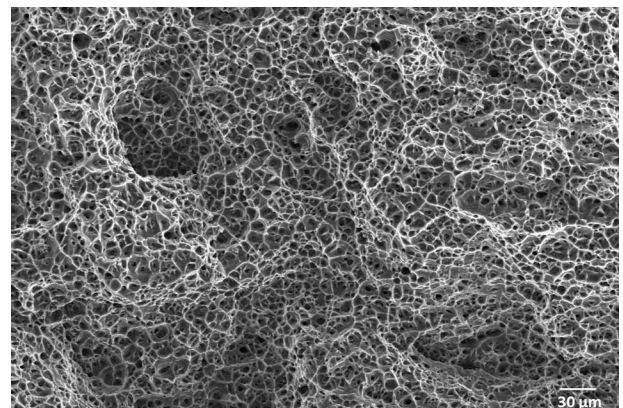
High magnified image of the fracture surface shown in Fig. 158 indicating very fine equiaxed dimples throughout
